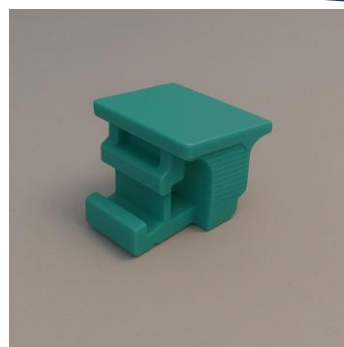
Snap joints used to attach tools to the aluminium extrusion designed by Mohamed Rafea using SolidWorks
